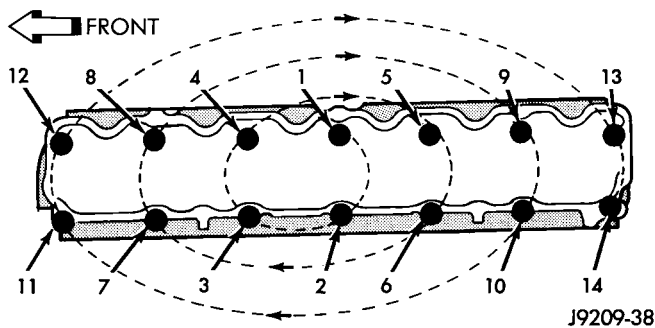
Engine Cylinder Head Bolt Tightening Sequence
